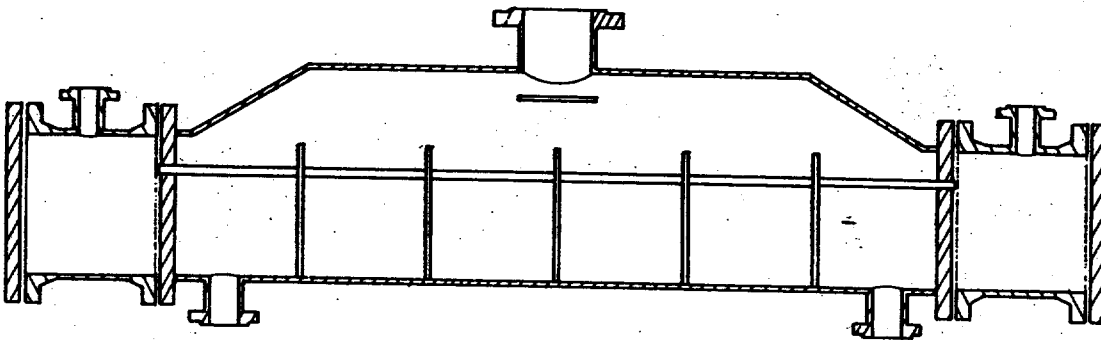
Fixed tubesheet kettle reboiler (AKL)
